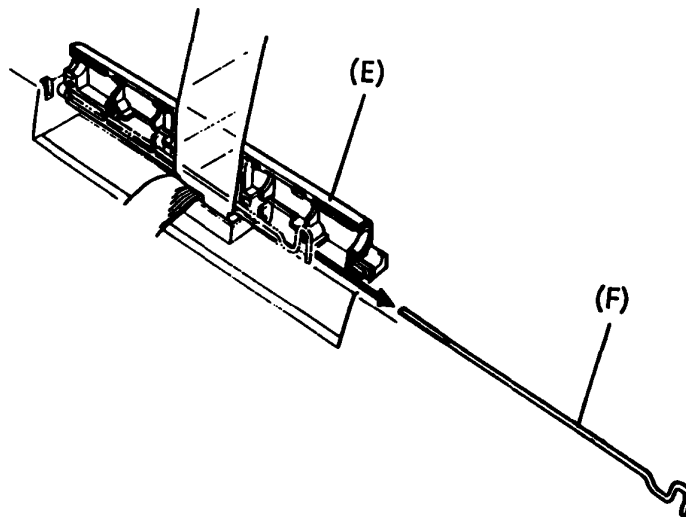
Removing the Hinge Cover and Torsion Bar
